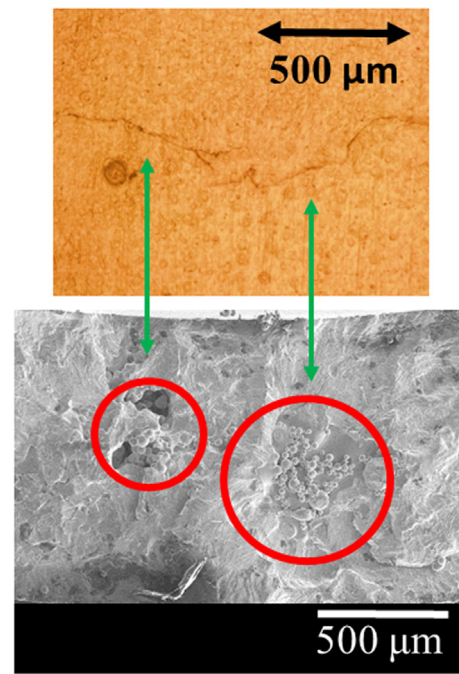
Representative of internal cracks coalescence under combined in-phase axial-torsion loading on a machined surface annealed specimen fabricated with AM250 [94].
